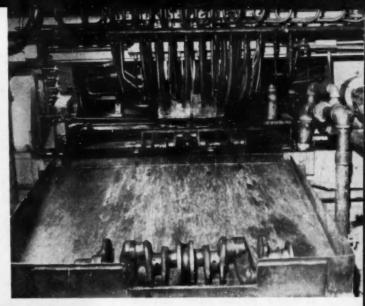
Rear view of the Flamatic machine showing, in the foreground, a shaft that has been quenched after flame hearing of all bearings and, at center, another shaft emerging from the quench on a woven wire belt.
